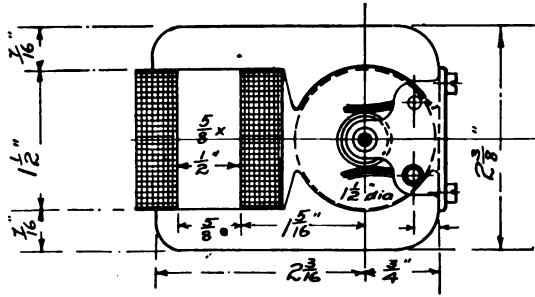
SMALL TRIPOLAR TRACTION MOTOR FOR 1 1/4-IN. GAUGE LOCOMOTIVE.
